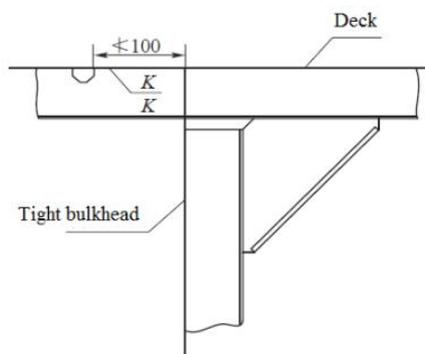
Position of double-sided continuous round-the-end weld
